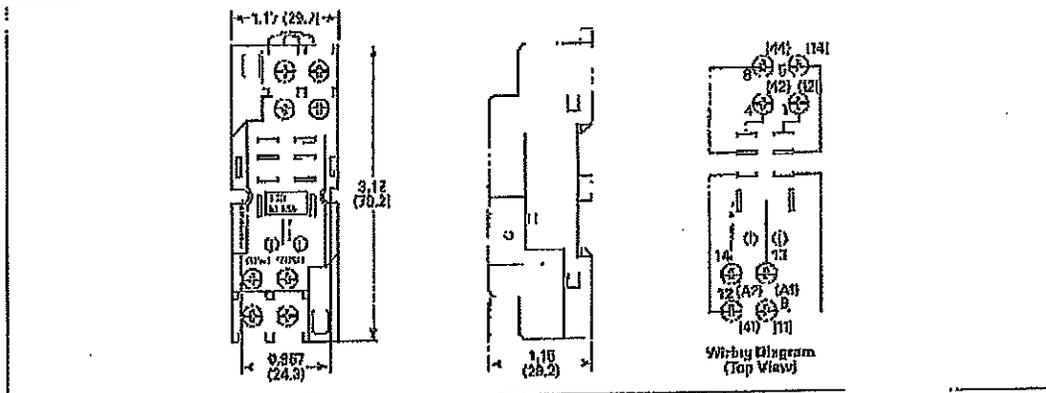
D7PAA — Approximate Dimensions in Inches (mm)
